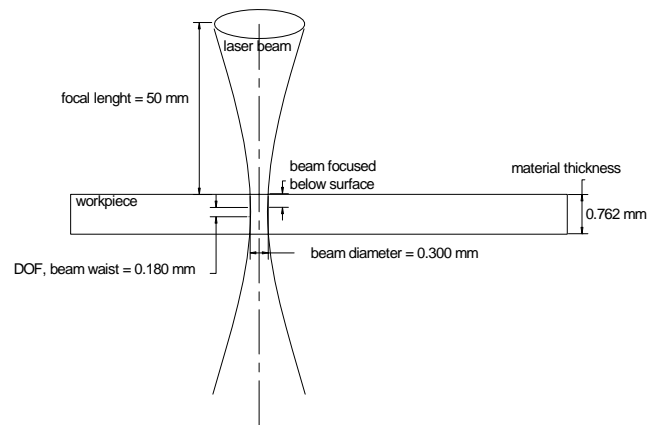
The laser beam focused on the workpiece and cross section of the laser penetrating the workpiece.
